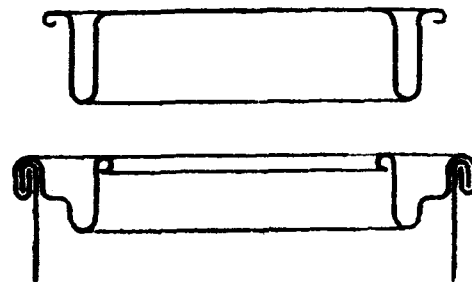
TYPICAL ONE-PIECE CLOSURES
